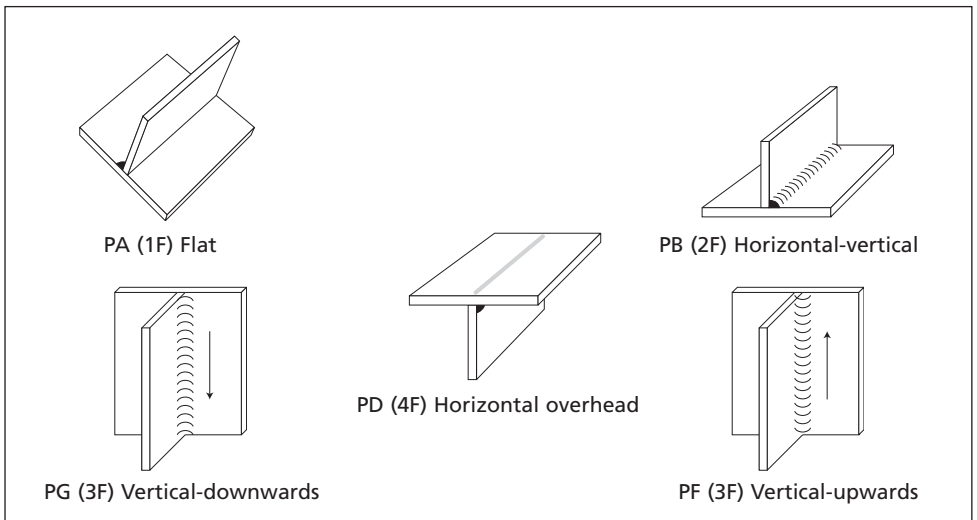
Welding positions for fillet welds – EN 287-1 (AWS designations are given in brackets)
